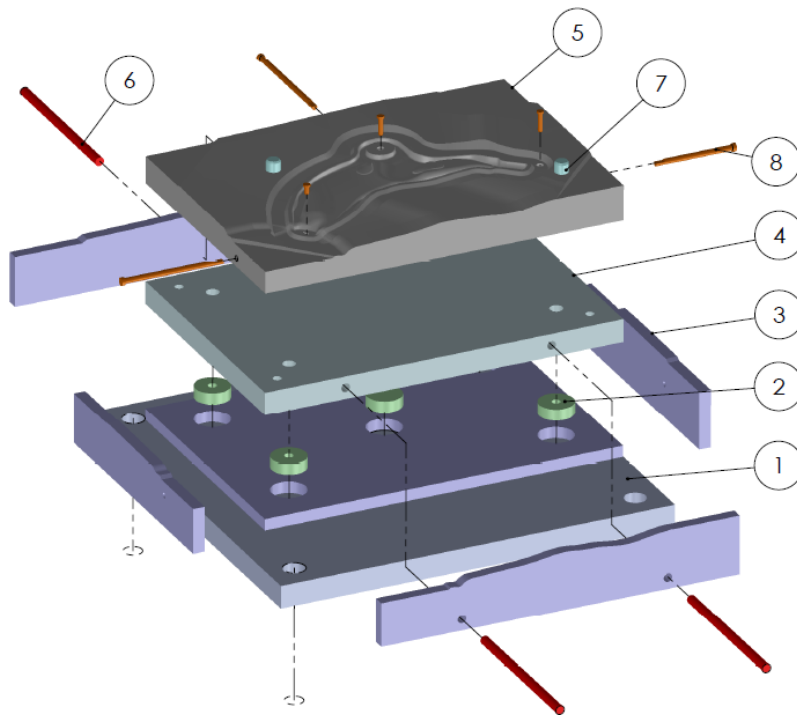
Exploded view of the lower forging tool showing key components (1st design iteration)
